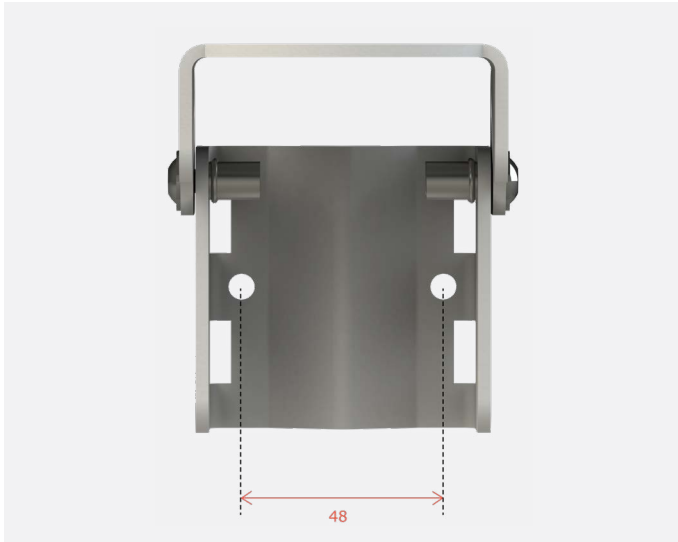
Installation of PMF01 on a surface, step 1.
